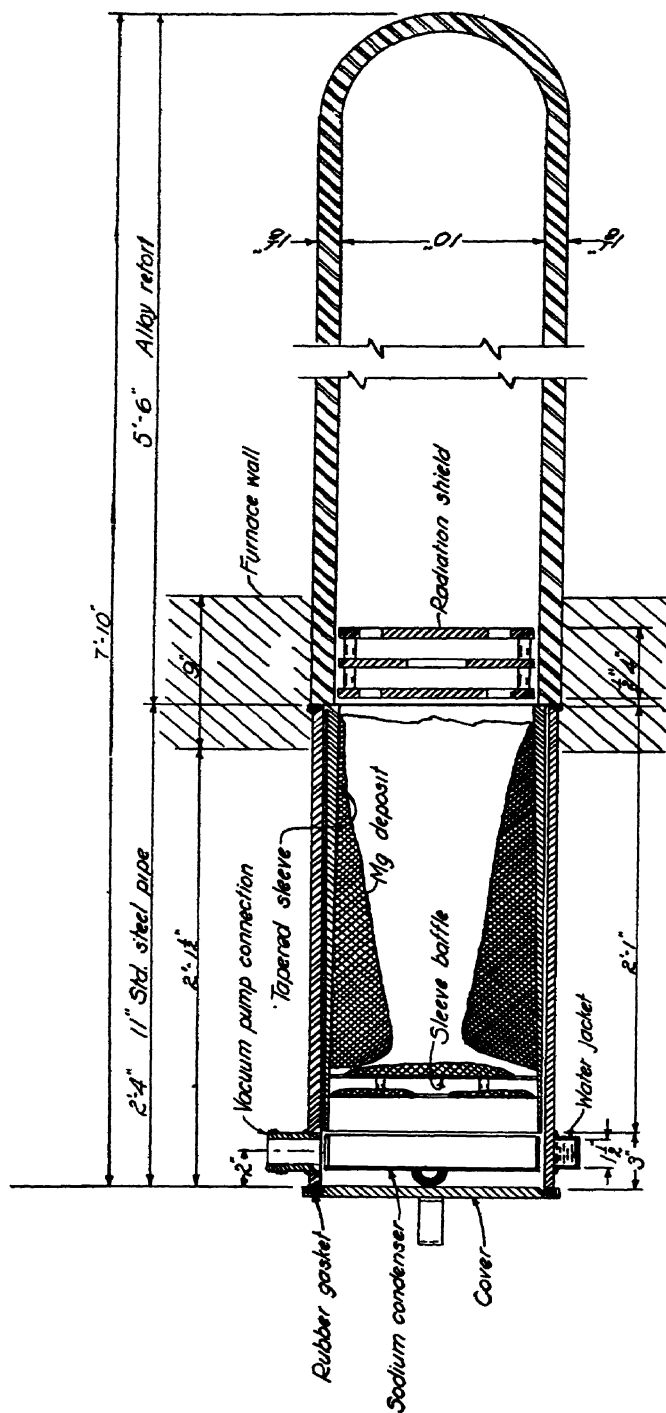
RETORT AND CONDENSER ASSEMBLY.
